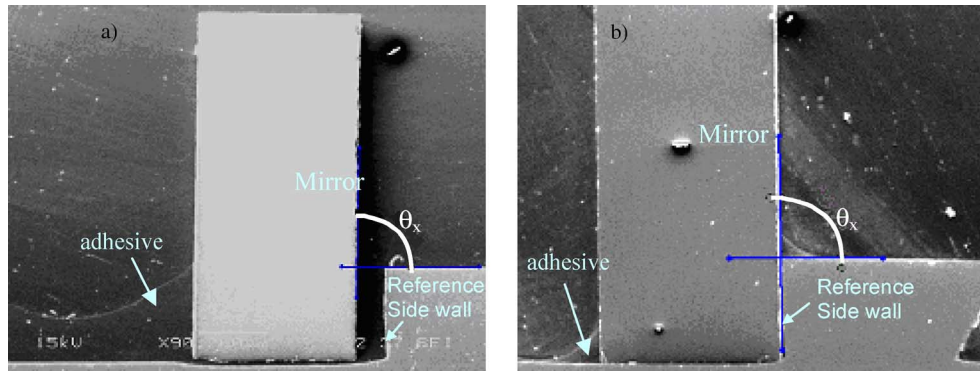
Cross-sectioning view mirror assembled using (a) huge amount of adhesive and (b) less amount of adhesive.
